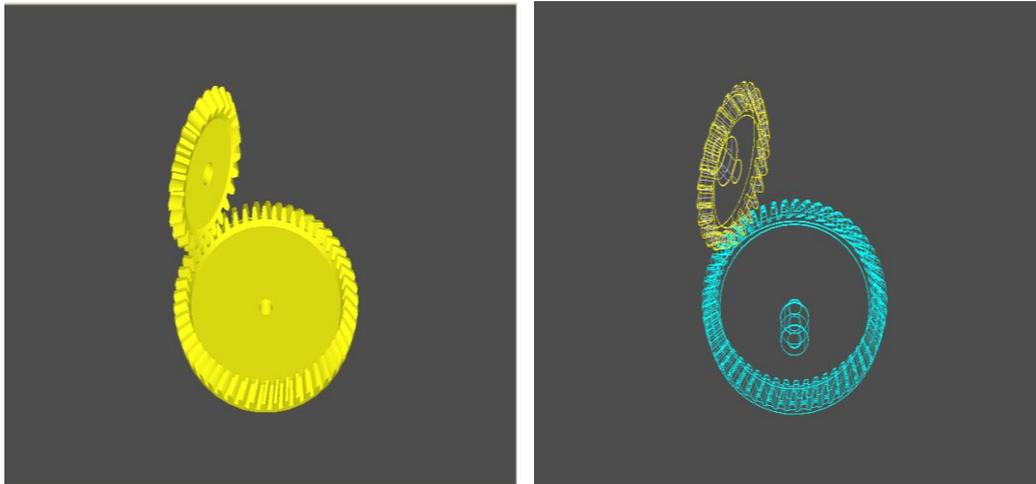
Gear Assembly (Solid Model and Wireframe Model).
